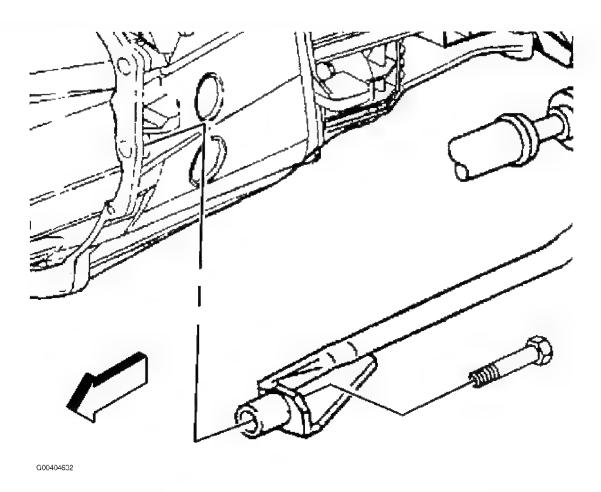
Removing/Installing Left Side Transfer Case-To-Transmission Support Brace Bolt (4WD)
